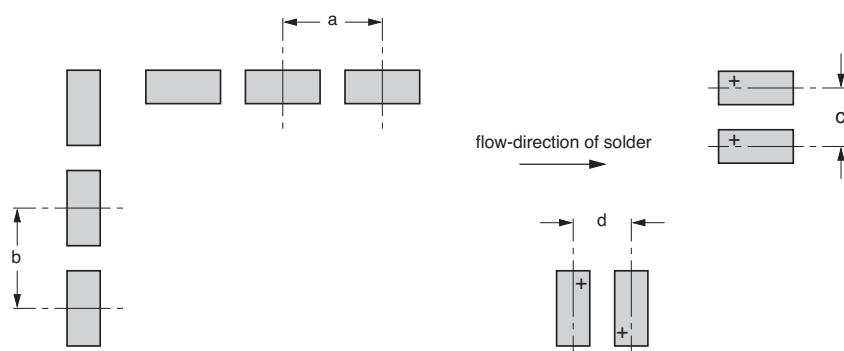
Recommended pad dimensions for reflow and wave soldering.
